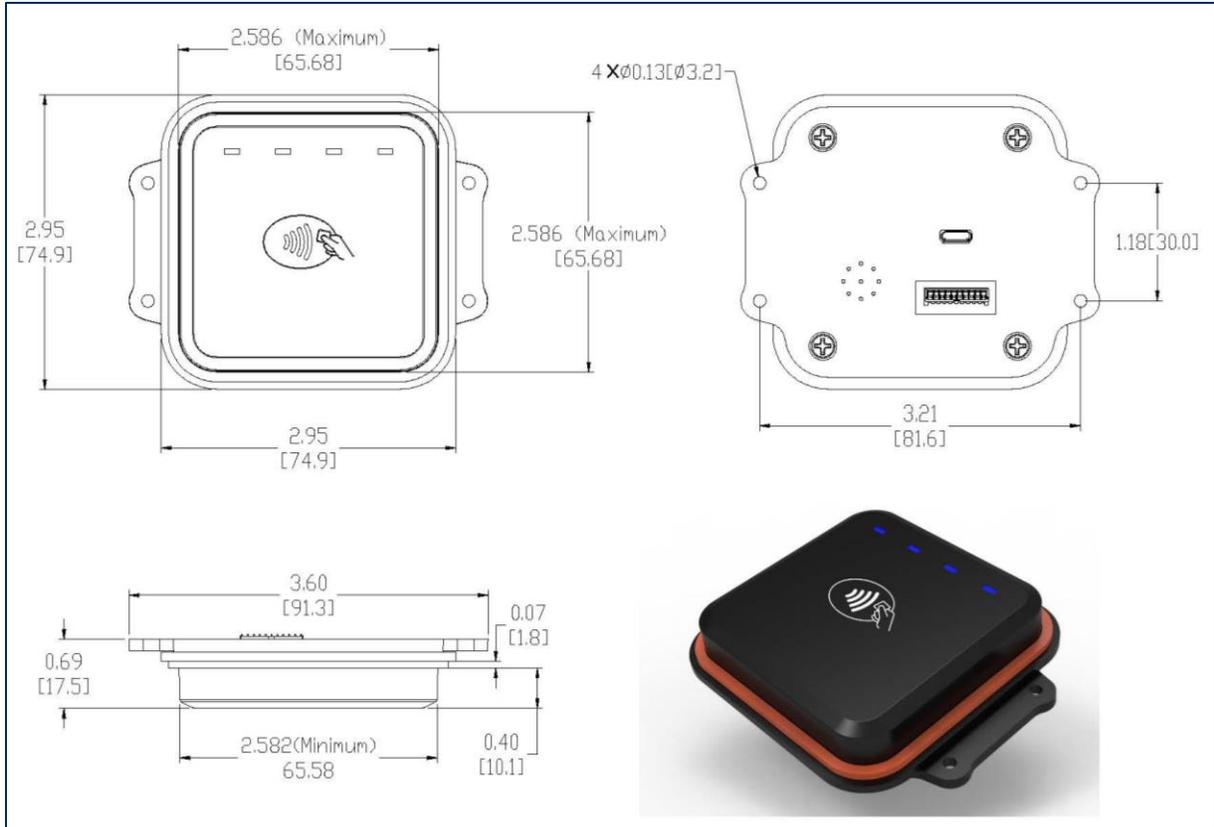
DynaWave (Low Profile) Mechanical Dimensions in mm [inches]
